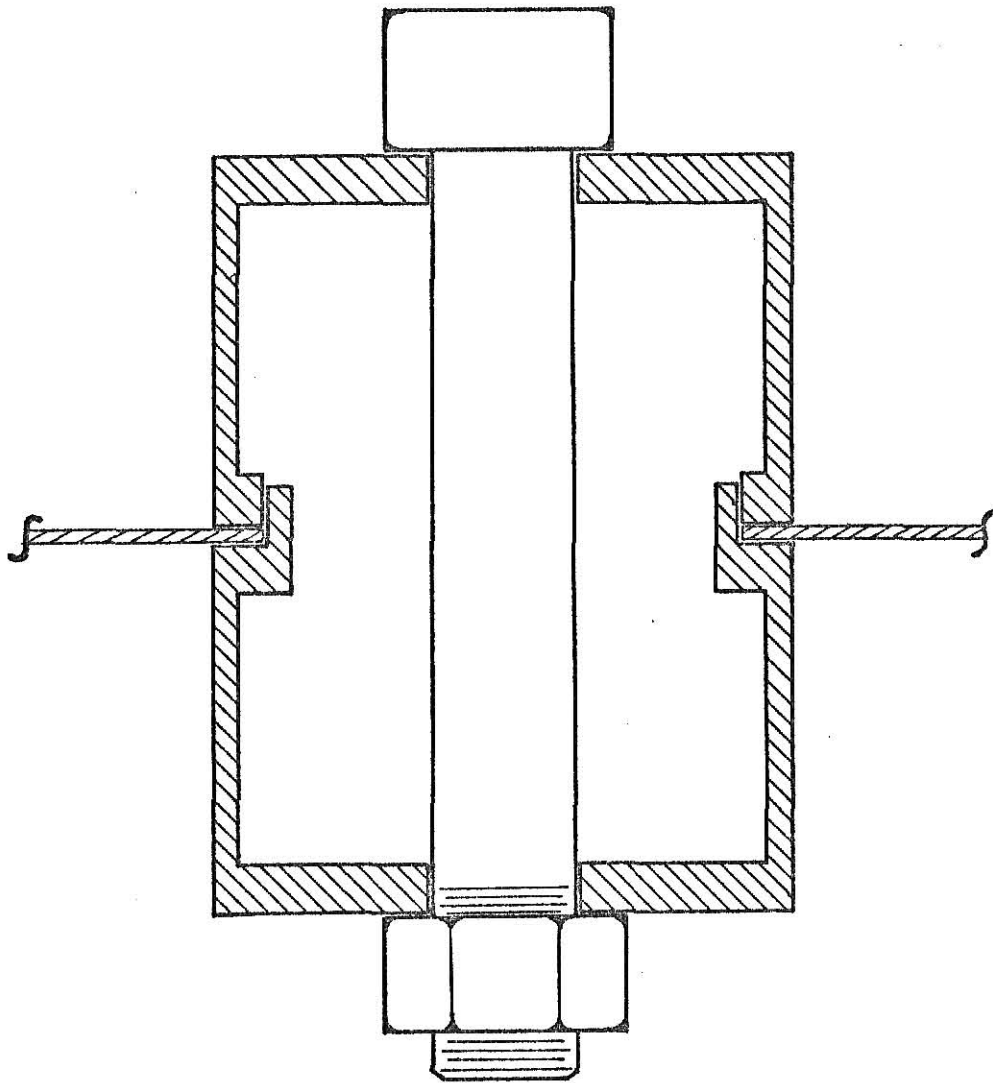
Rigid Mass of Cylindrical Shell Design, Specimen A.
